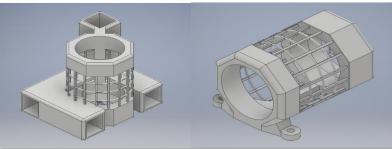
CAD Mechanical Drawings of Corner Shroud (left) and Side Shroud (right)
